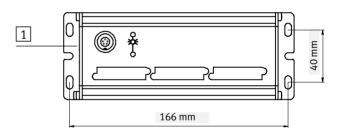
/2: Mounting dimensions for CP-E16...-M...-...
